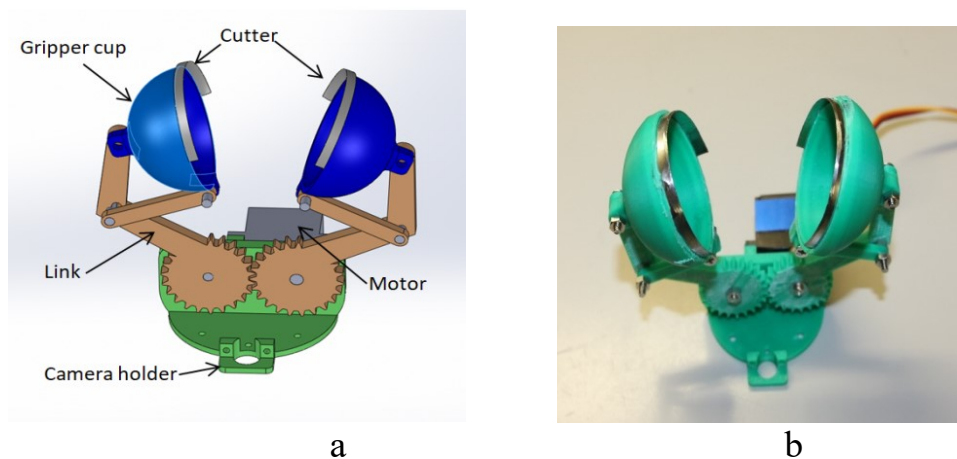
a) Gripper CAD design and b) Fabricated prototype
